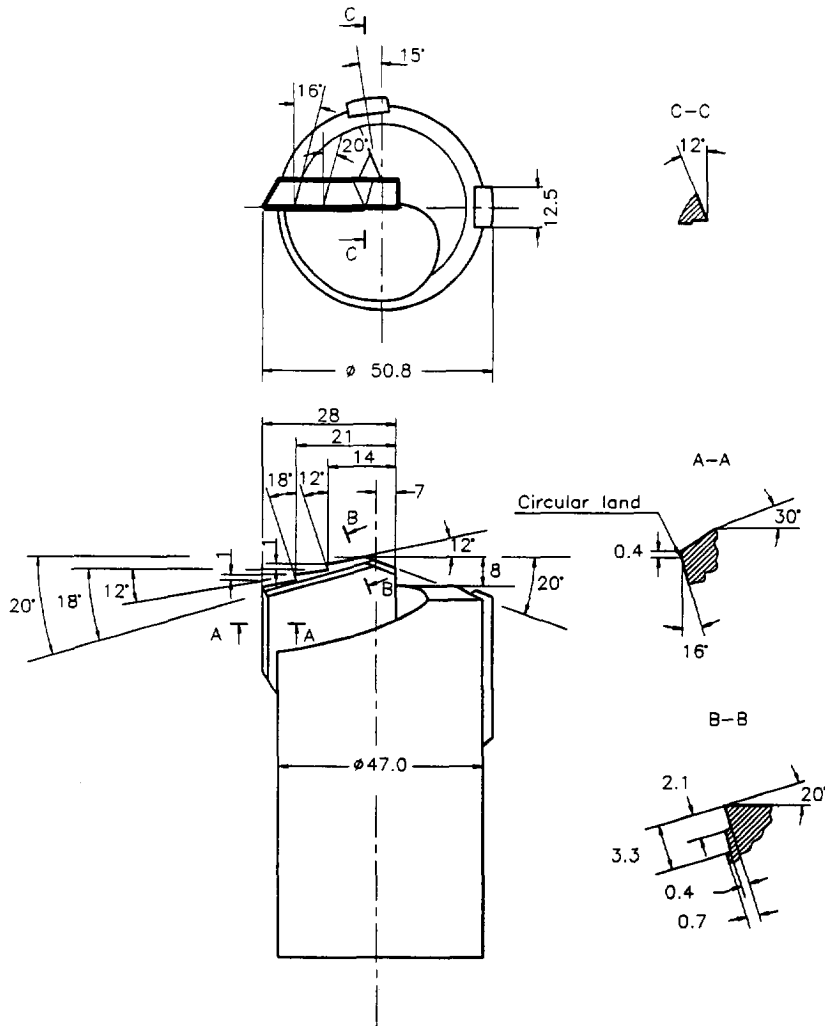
Design parameters of a single edge B.T.A. solid boring head (Drill "A").
